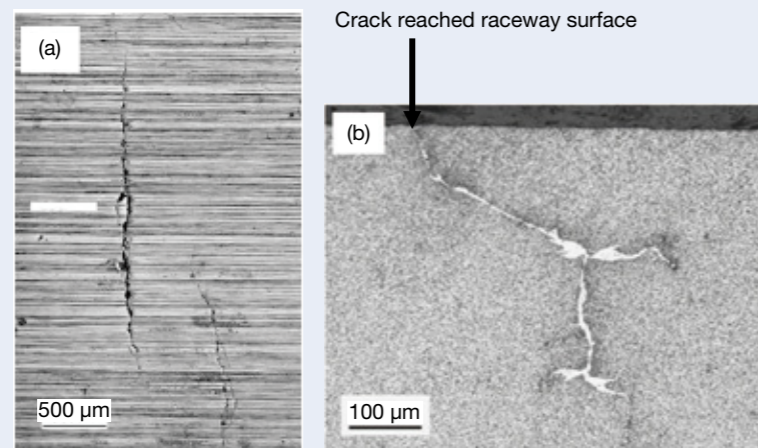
The raceway surface and the cross section of a failed bearing with axial cracks.
